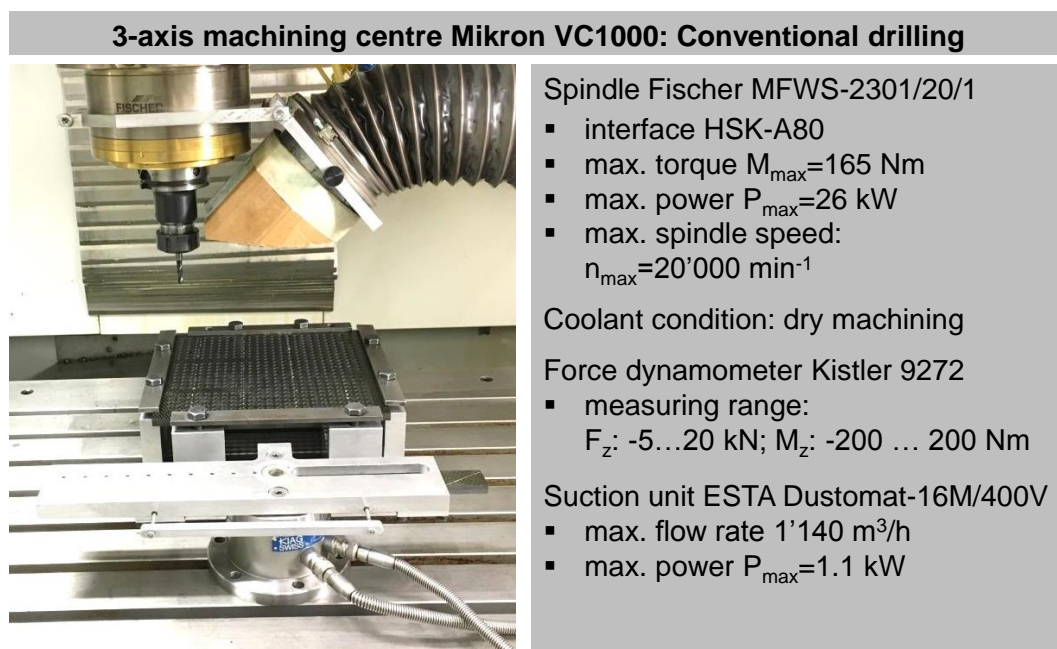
Experimental setup and specifications of the machining centre used for drilling tests
